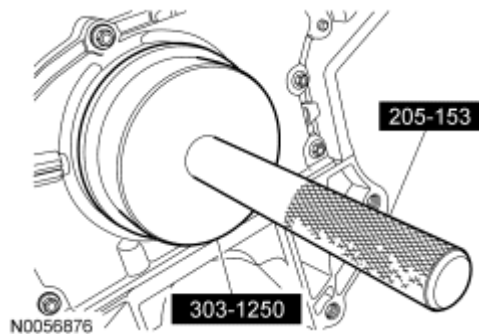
Installing New Crankshaft Rear Seal Using Special Tools (303-1250) & (205-153)
